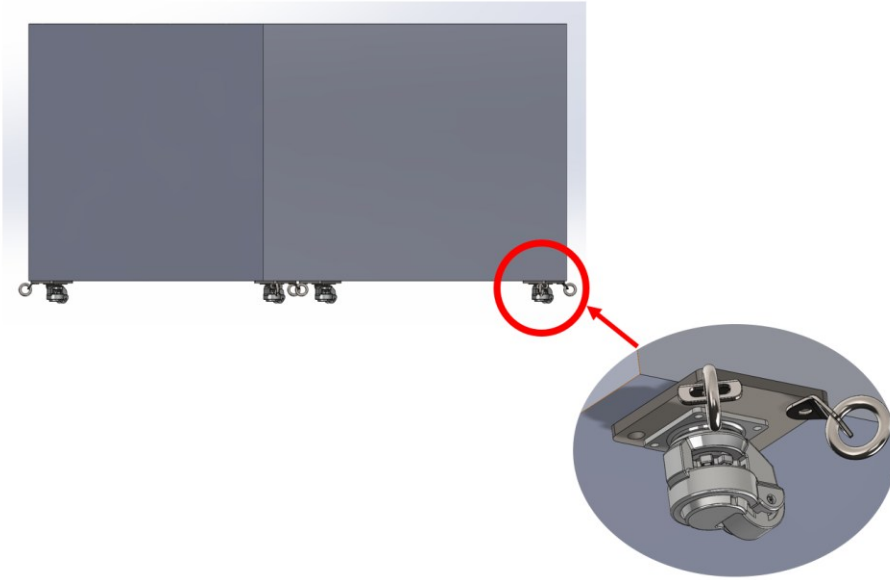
Mounting solution for attaching EVES-6060-NA to truck or trailer
